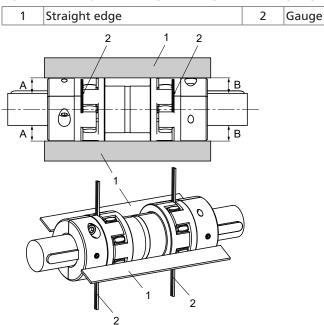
Double Cardan spacer-type coupling, checking the coupling alignment
